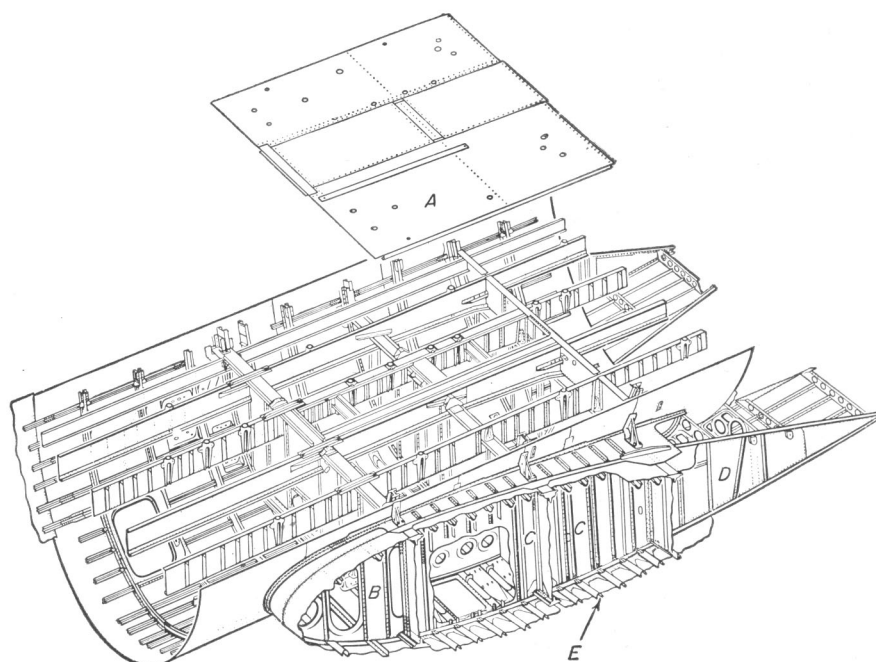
Douglas C-54 center-wing section cutaway view showing the construction and installation of floor beams and a typical floor section (A). Also cut away is a wing to show the nose, rib (B), 'tween-spars (C), and trailing edge (D), together with typical hat-shaped spanwise stringers (E).
